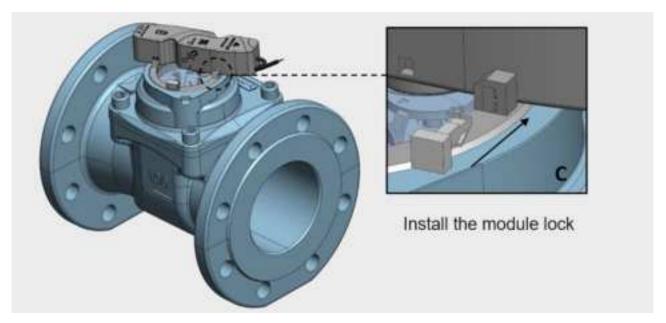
IN-PULSE induction module installed on an IP68 industrial water meter with the module lock installed.
